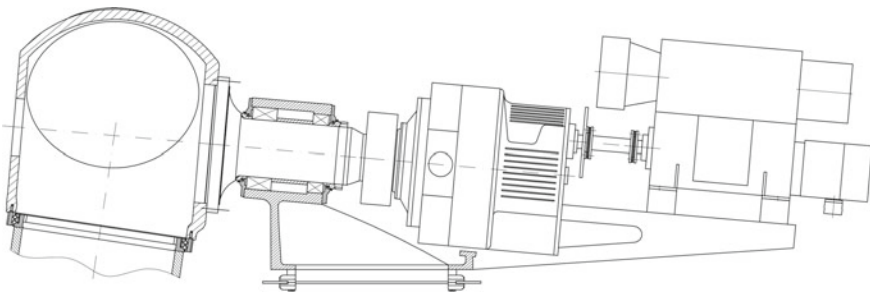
Bearing assembly in a closed housing [aerodyn]
